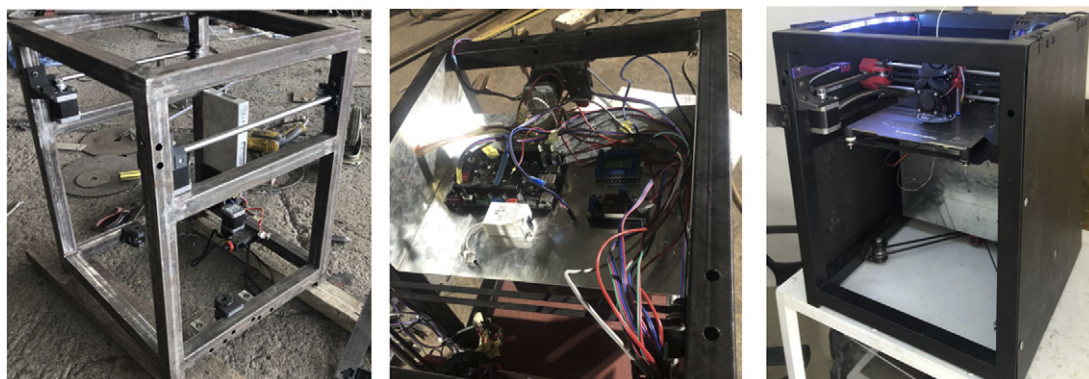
Left – Manufacturing the printer frame, Center – Electrical wiring and Right – Finished 3D printer.
